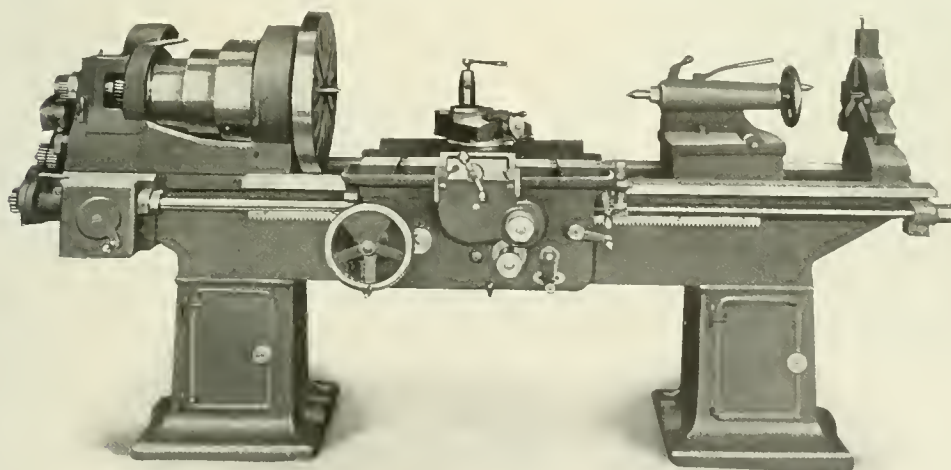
Twenty-inch Cone-head Lathe built by the John B. Morris Machine Tool Co.
